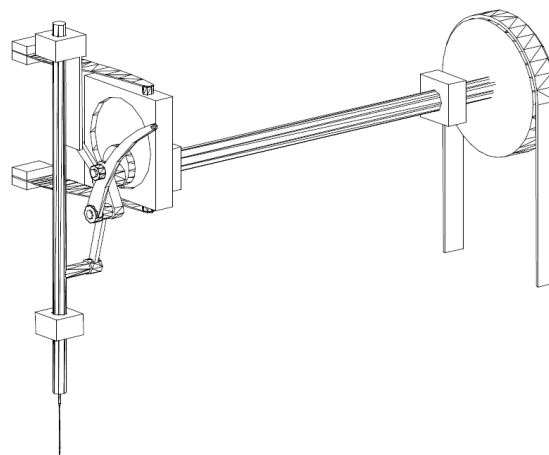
Schema of upper mechanisms of sewing machine. Needle bar mechanism and thread feeder mechanism with additional balancing mechanism.
